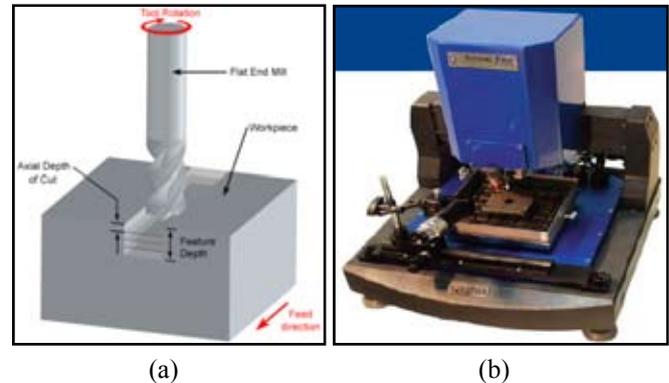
(a). Basic End Milling Operation, (b). Three Axis-Vertical-Micromilling Machine -53725-2505939 [6]
